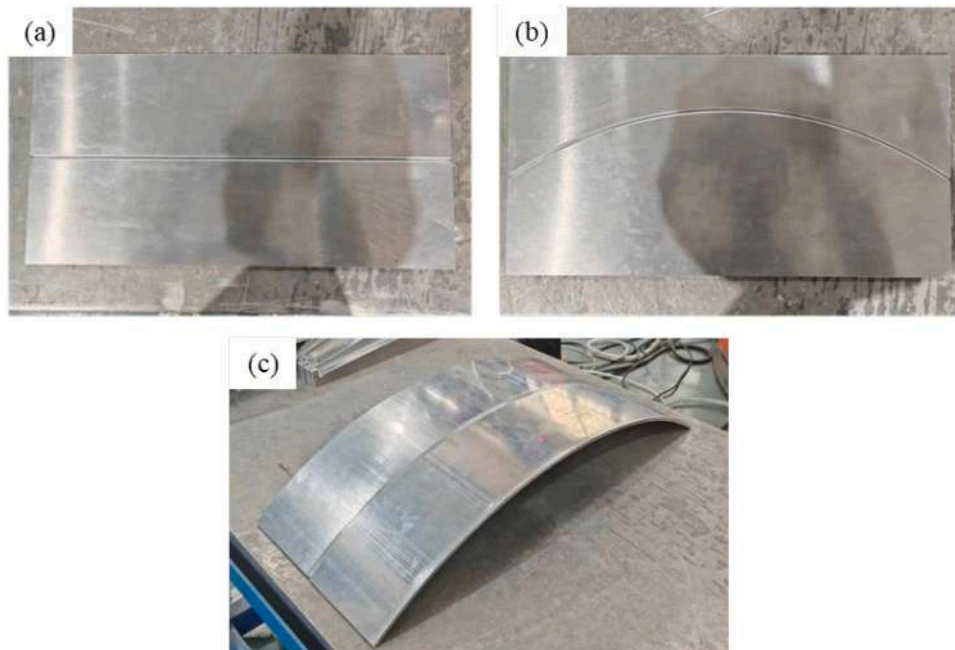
Workpieces for point cloud construction experiments (a) Linear weld seam (b) Curve weld seam (c) 3D curve weld seam.
